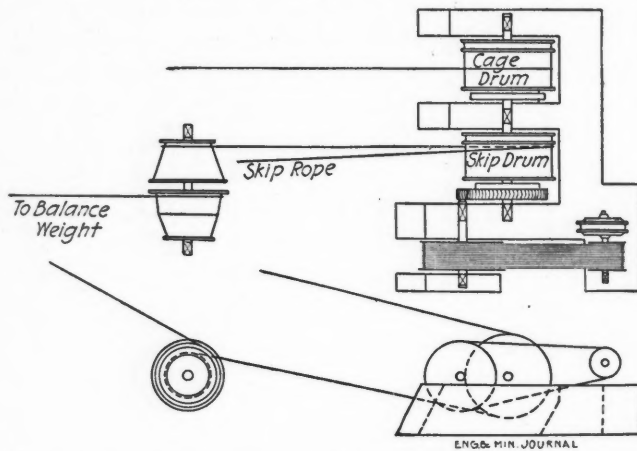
ARRANGEMENT OF CURRY HOIST AND BALANCE DRUMS
